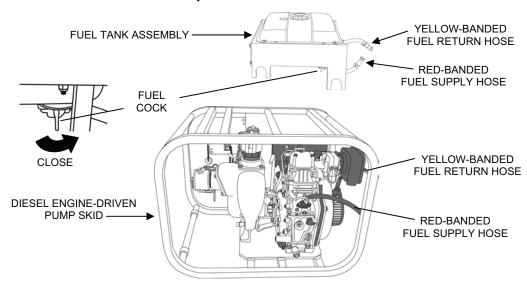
Raw Water Pump P-1 Skid Fuel Tank Assembly Removal.
